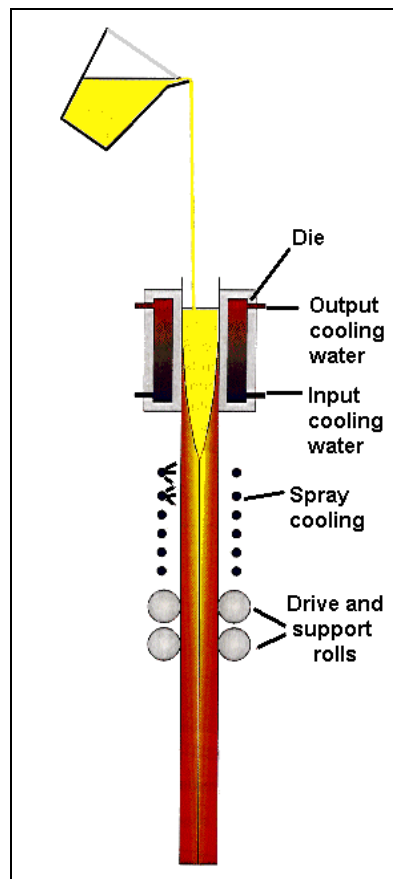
Schematic representation of a thread casting machine used for continuous casting [179, Hoppenstedt, 2002]
